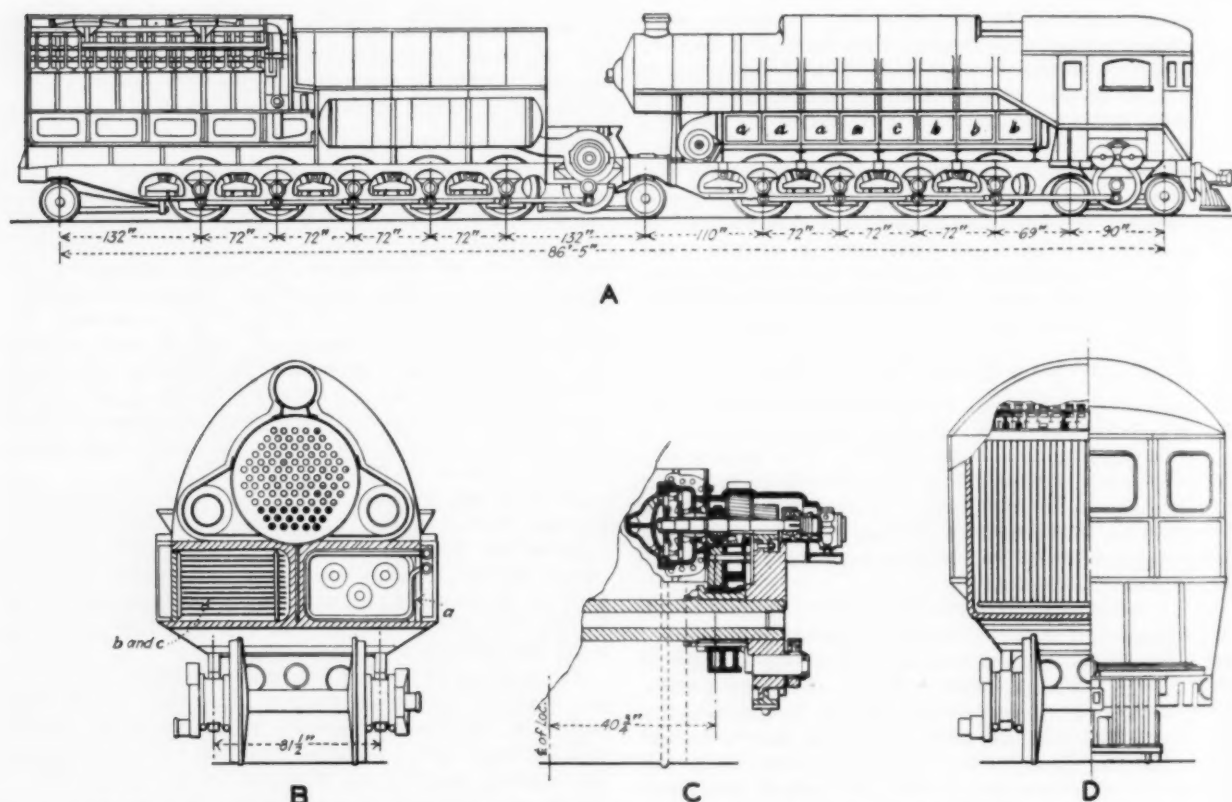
ELEVATION AND SECTIONAL VIEWS OF PROPOSED CRITICAL-PRESSURE CONDENSING STEAM-TURBINE LOCOMOTIVE (A—side elevation; B—sectional view showing heating tubes; C—sectional view of primary turbine; D—sectional view showing interstage superheater.)
